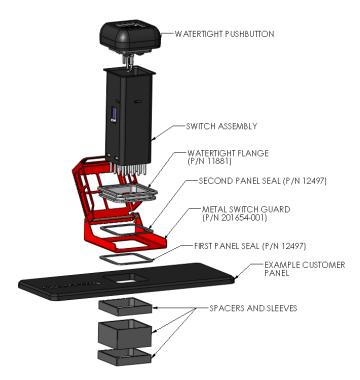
COMPLETE STACKUP OF COMPONENTS TO AID IN REASSEMBLY IF NECESSARY
